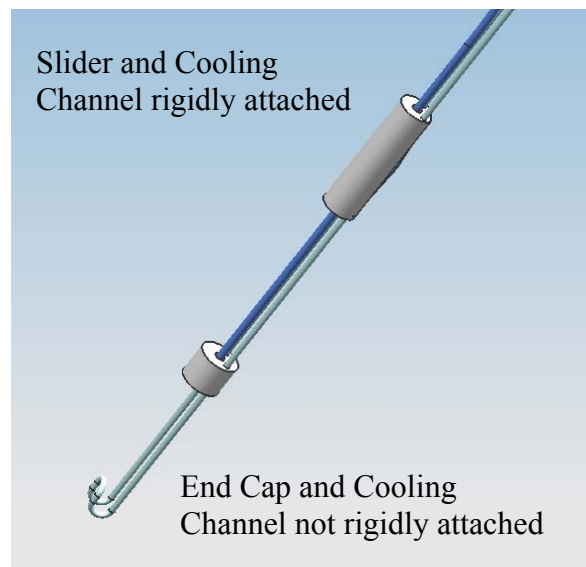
Internal Slider, End Cap, and Cooling Channel Assembly
